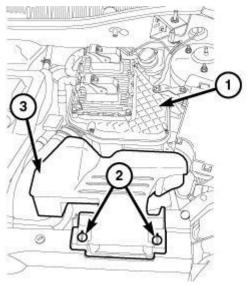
Retainers, Fresh Air Inlet Duct & Air Cleaner Body Courtesy of CHRYSLER GROUP, LLC
